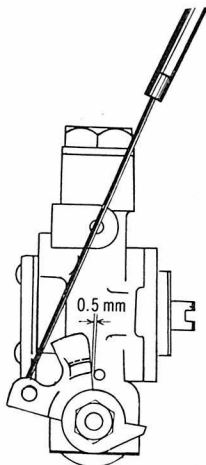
Clearance between "Posi-Force" control lever on pump and stop should be 0.5MM (0.019 inch) as shown with throttle fully open.
